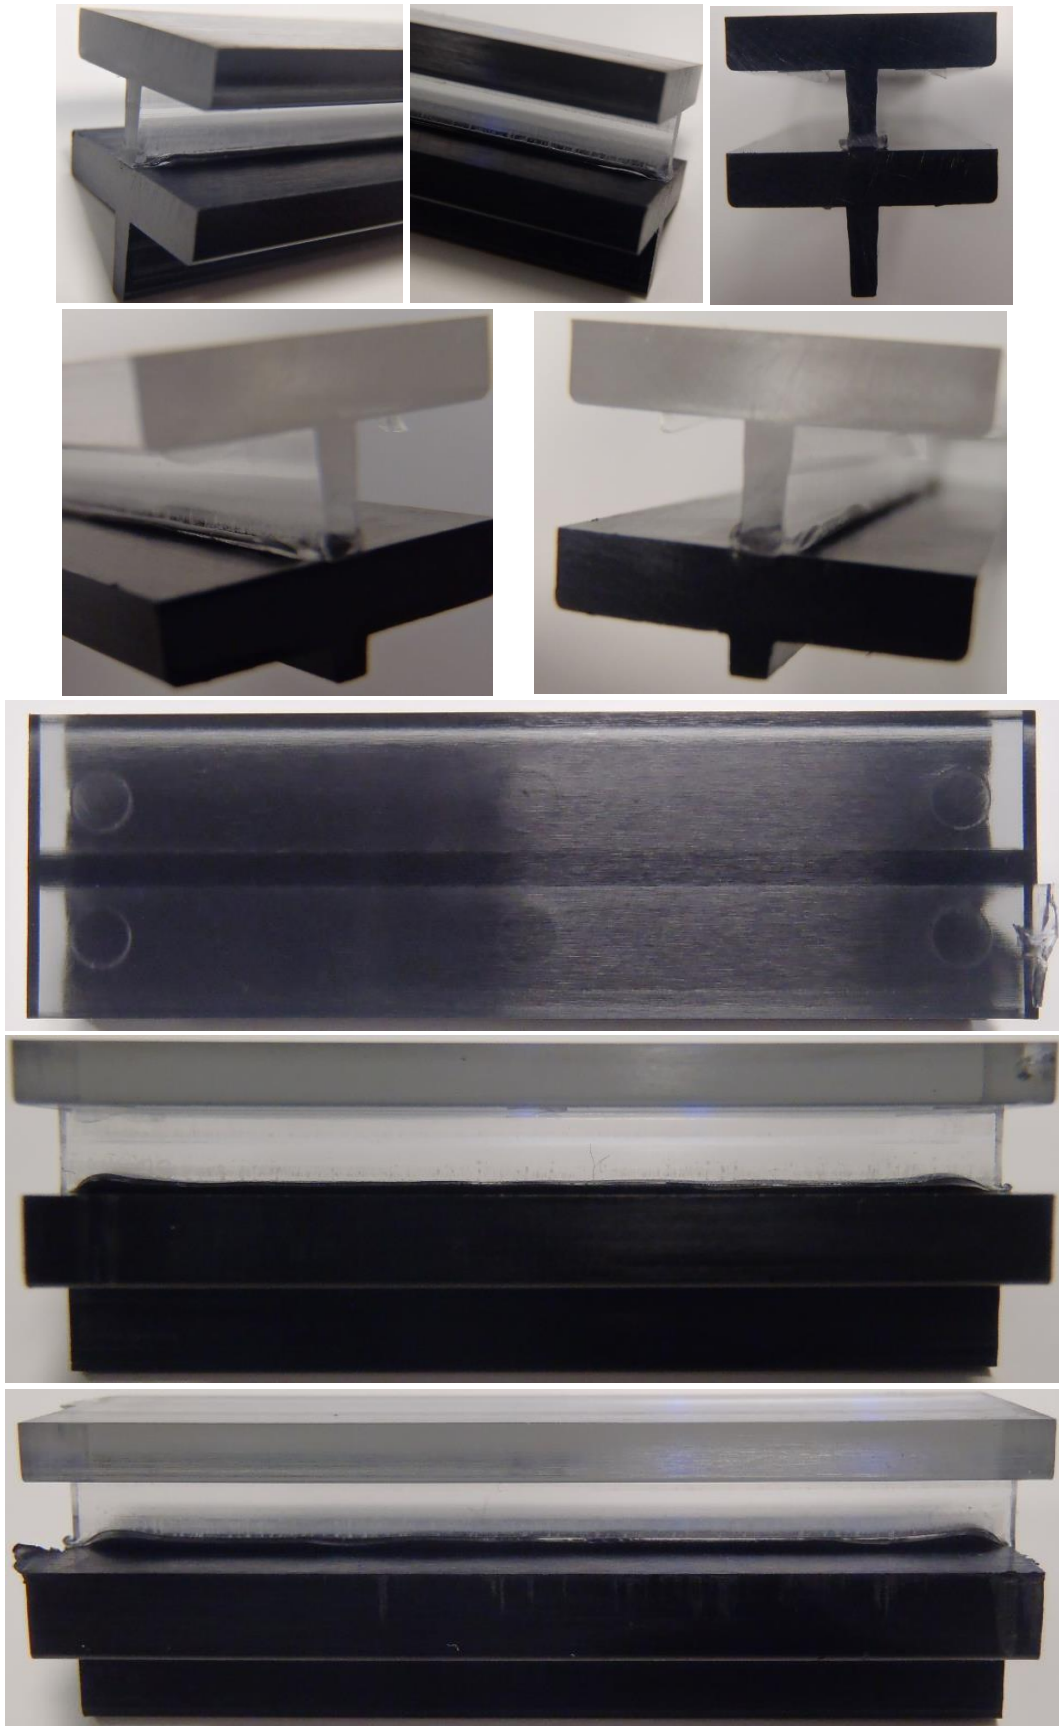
Welded samples obtained with the waveguide
